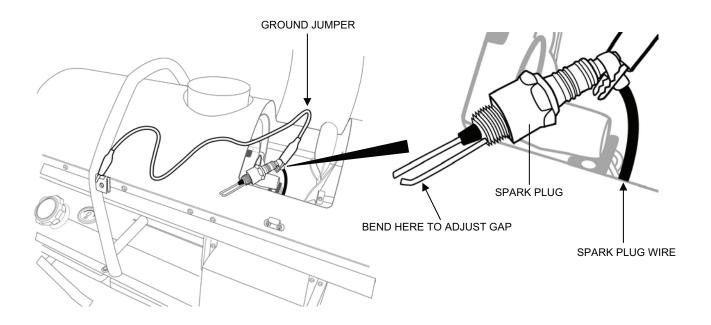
Diesel Heater Spark Plug / Transformer Test Set-Up.
